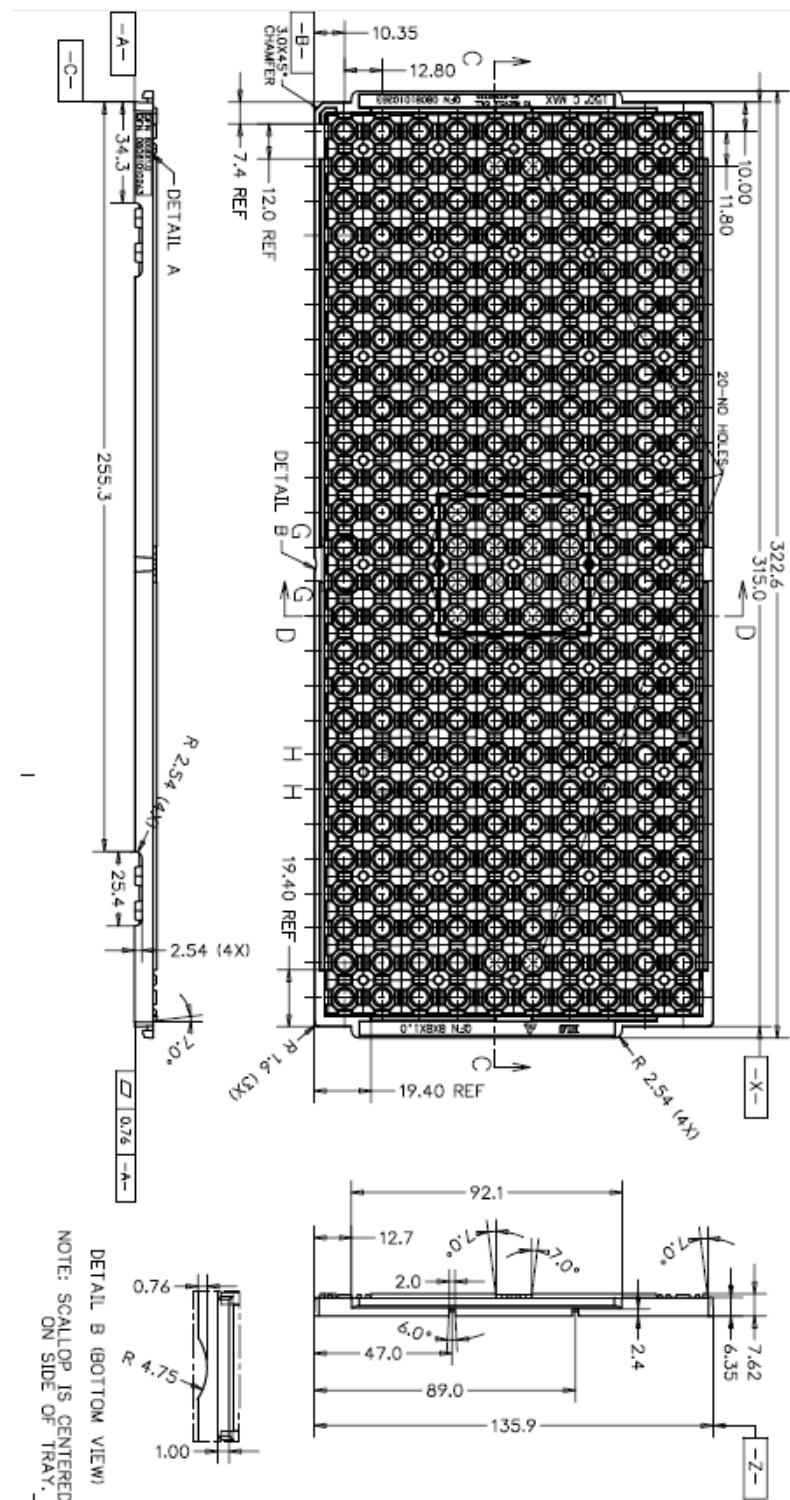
VNC2 - QFN-48 and QFN-64 Tray Dimensions
